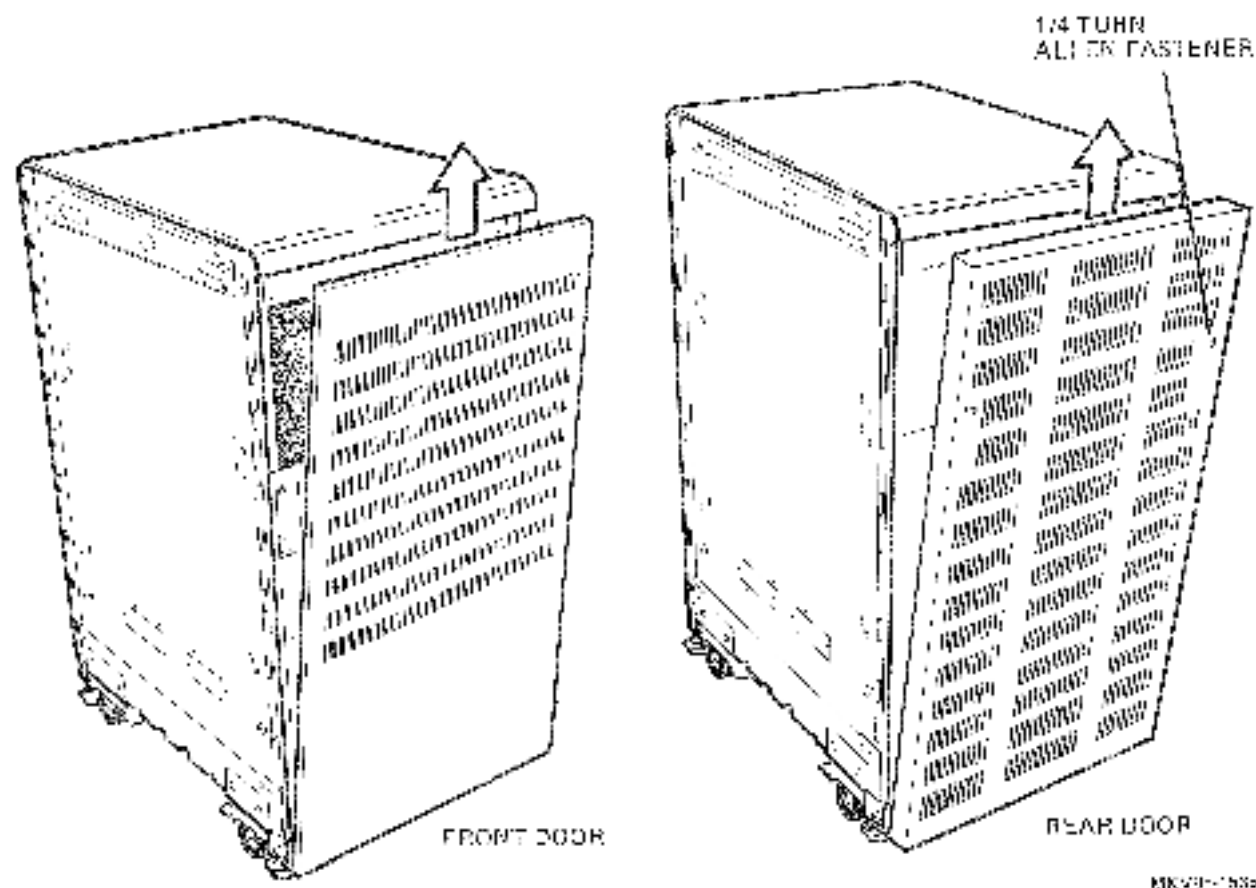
CIPA Cabinet - Front and Rear Panel Removal
